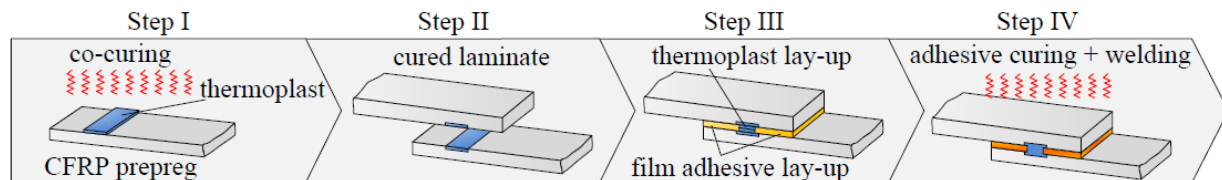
Manufacturing steps for hybrid bonded and welded joint (Hybrid Bondline)
